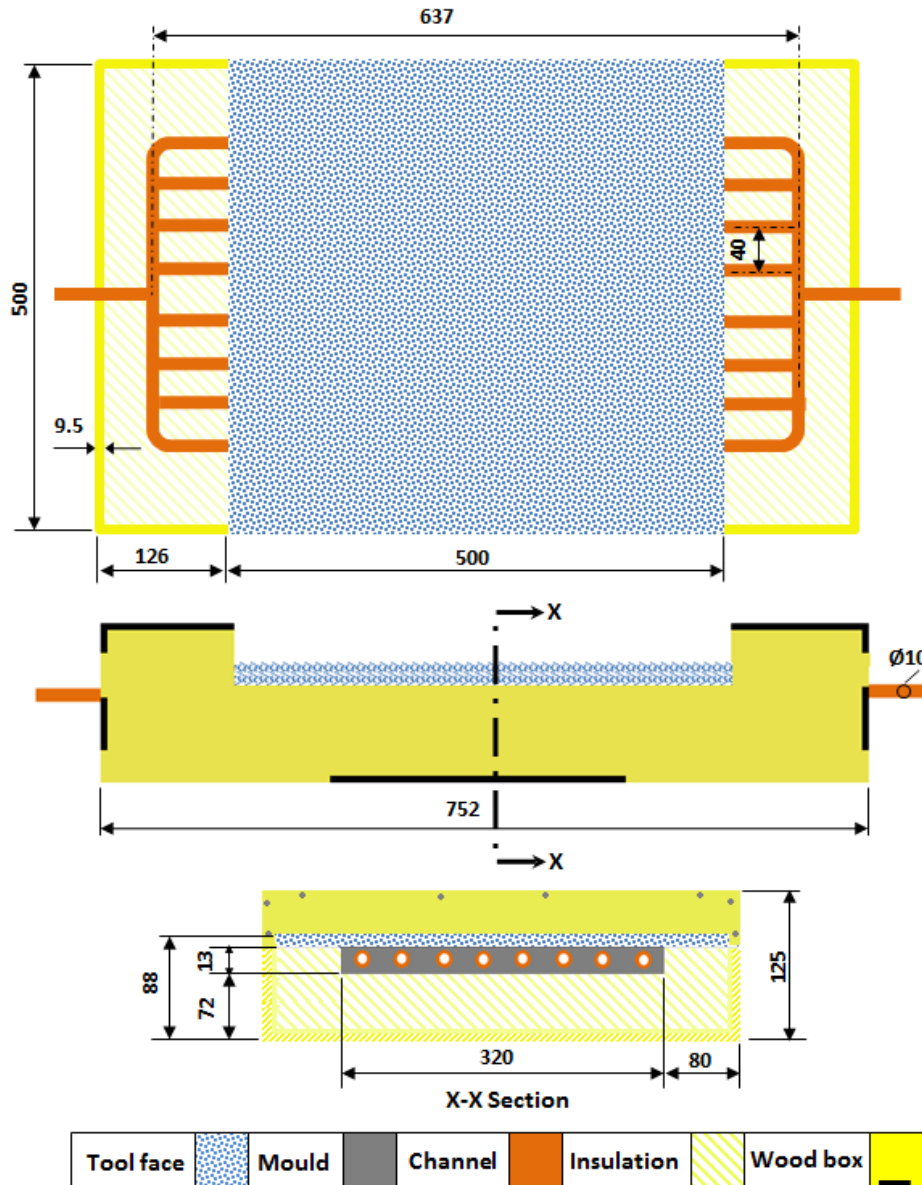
Dimensions (mm) of the optimal experimental tool
